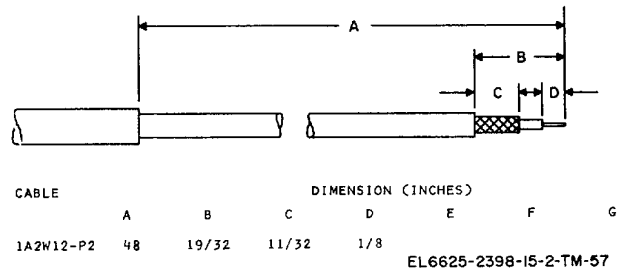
Cable stripping detail for 1A2W12-P2.
